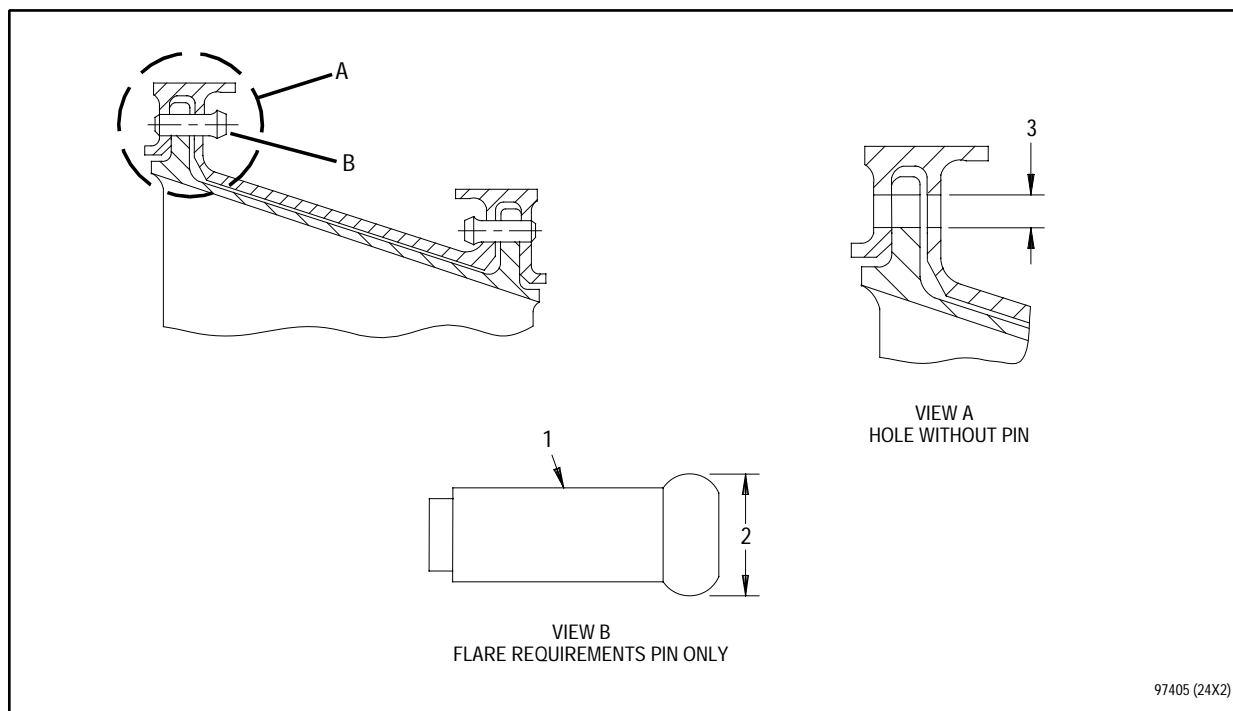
Air Sealing Ring Front Retaining Pin Hole Location - Transfer to Replacement Stator Vane Using PWA 71547 Fixture
